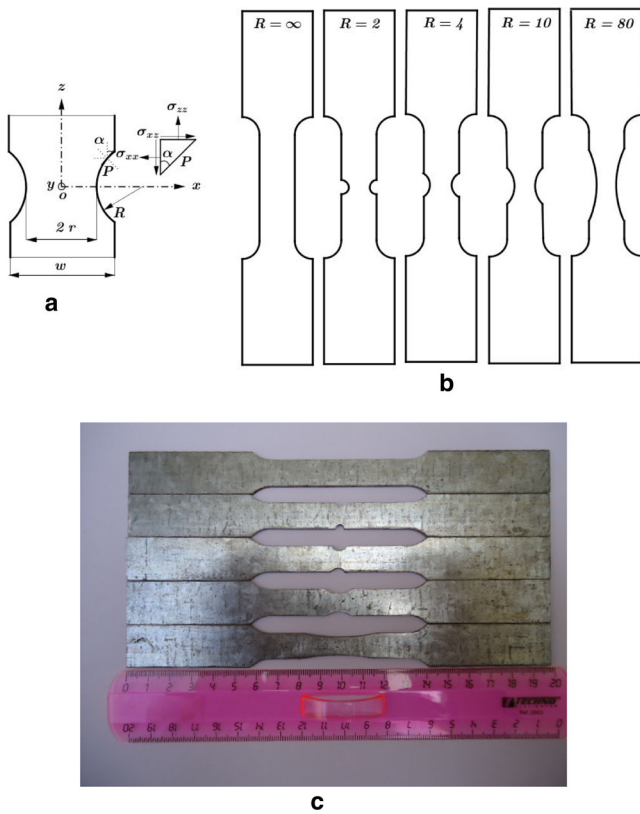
a The cross section of flat grooved plane stress specimen after fracture. b Shape of the grooved specimens according to the radius R . c Smooth and grooved specimens
